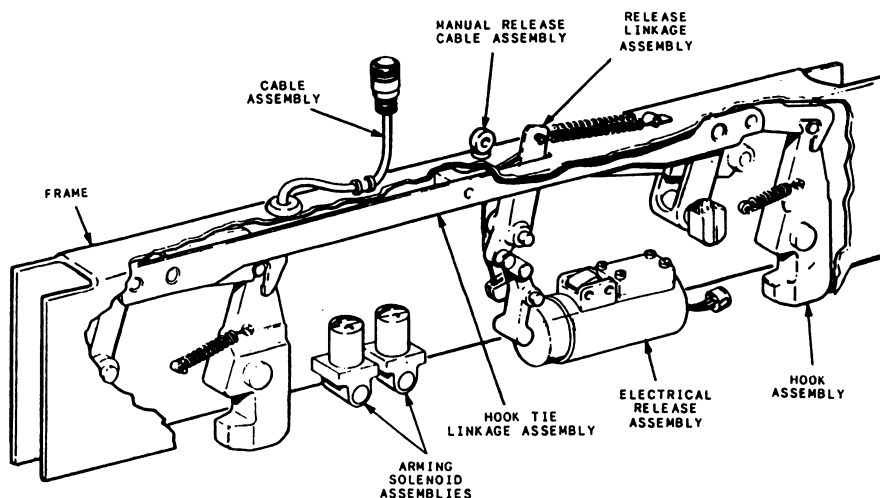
Cutaway view of a typical Aero 65A bomb rack.
